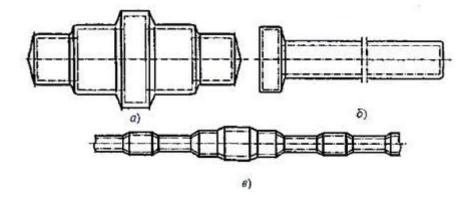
Billets, obtained by the methods: a - stamping in the dies; B-stamping on a horizontal-forging machine; in-cross-screw rolling
